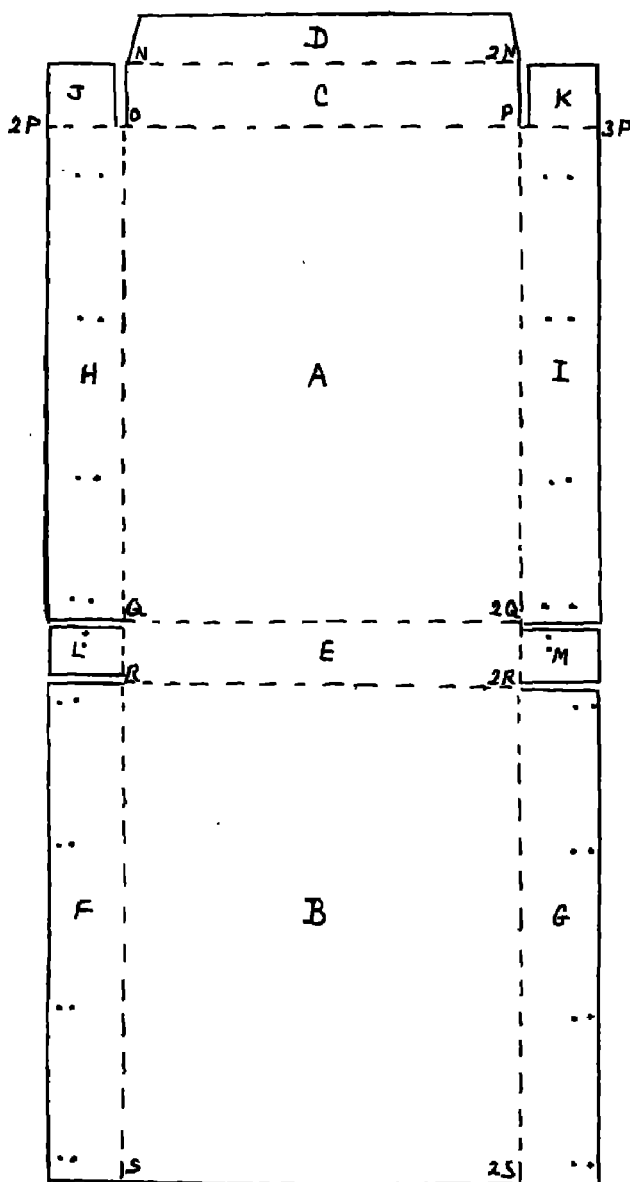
STOUT SINGLE-PIECE STAPLED BOOK BOX.
